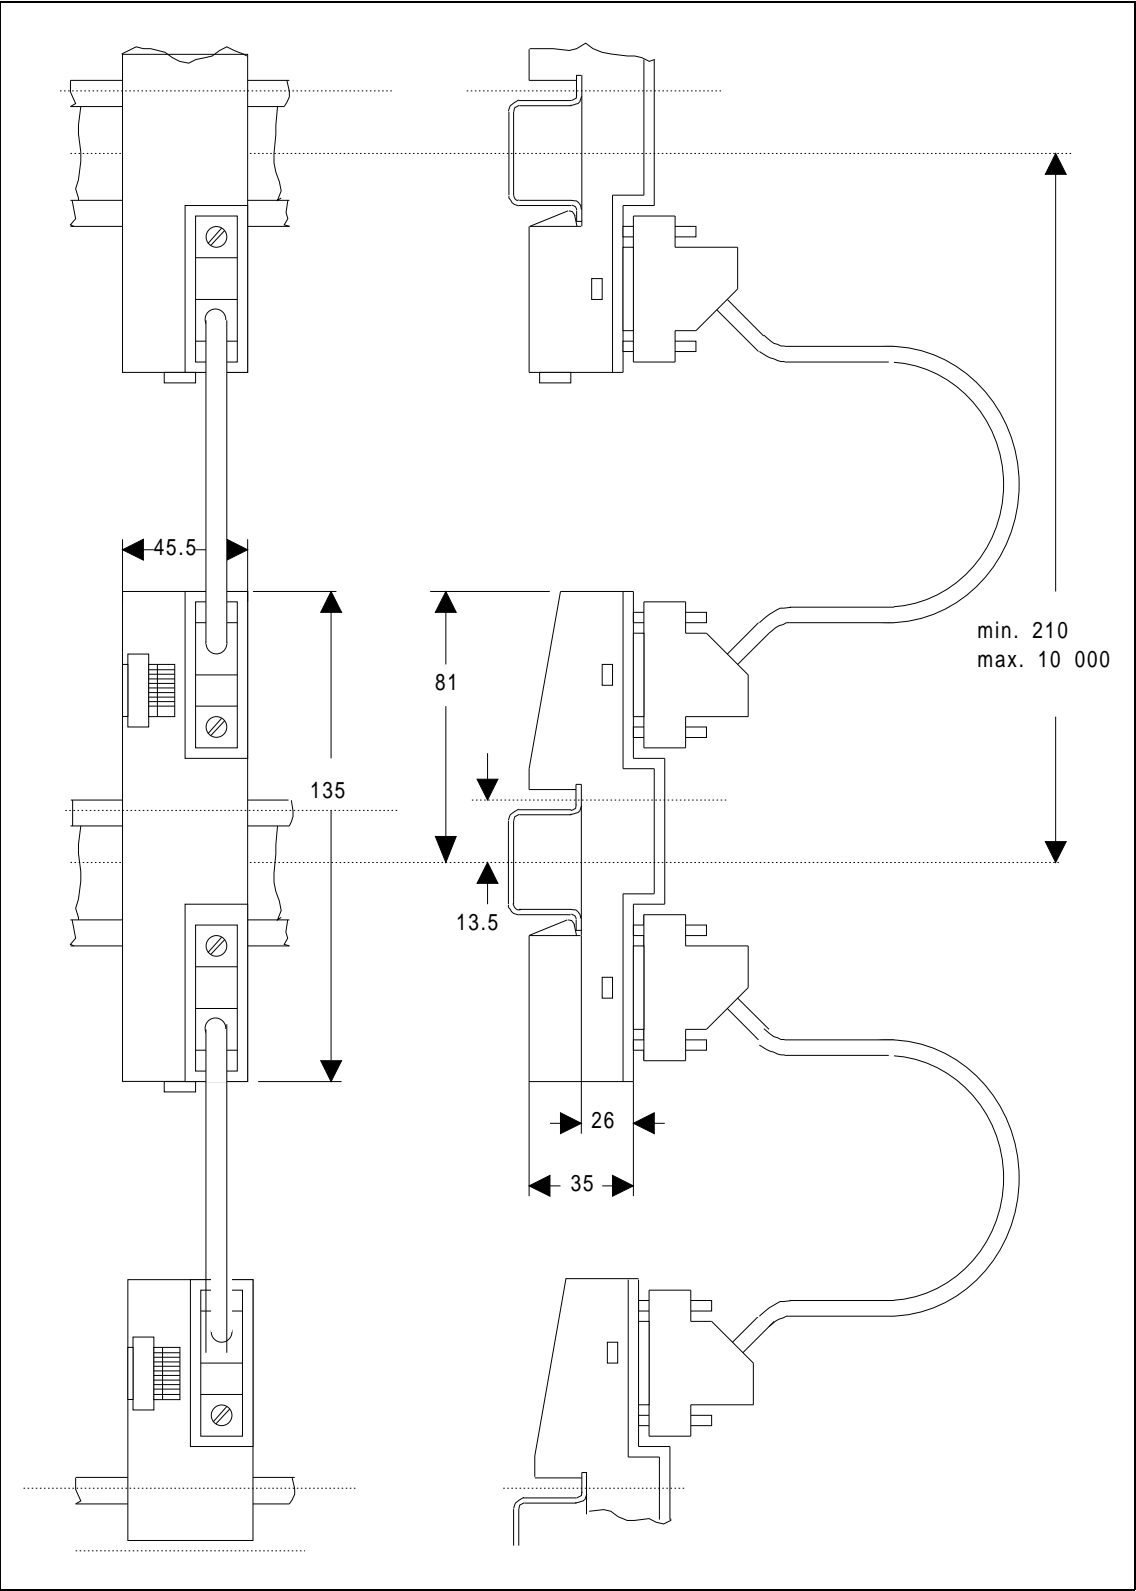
Dimension Drawing of the IM 316 Interface Module
